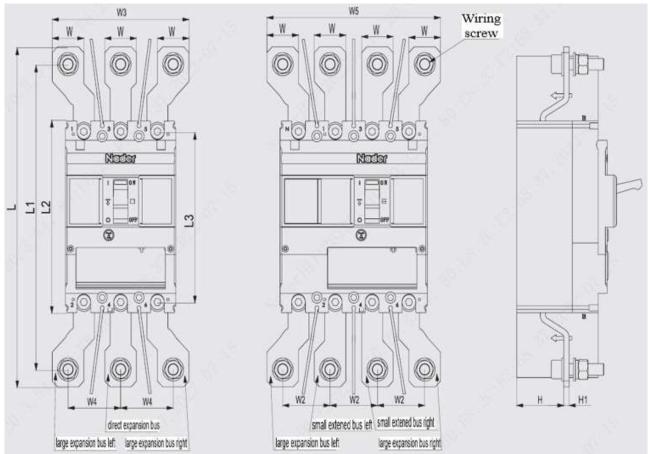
Outline and installation dimensions of expansion wiring in front of the board Table 20 Boundary dimensions of extended wiring products in front of the board (unit: mm)
